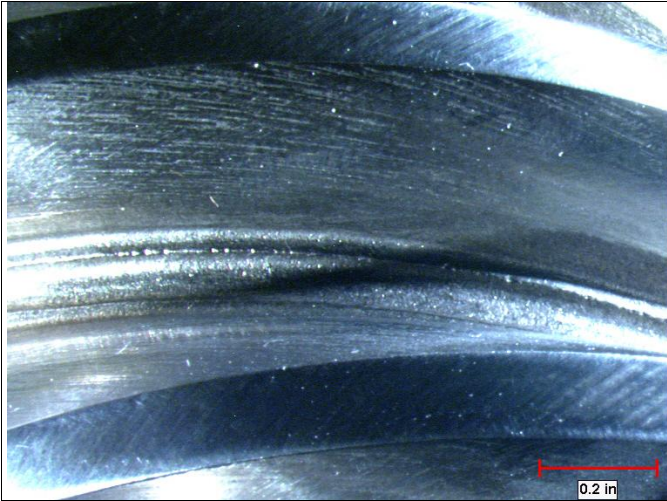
V1L417 MID-TOOTH FLANK AND ROOT
